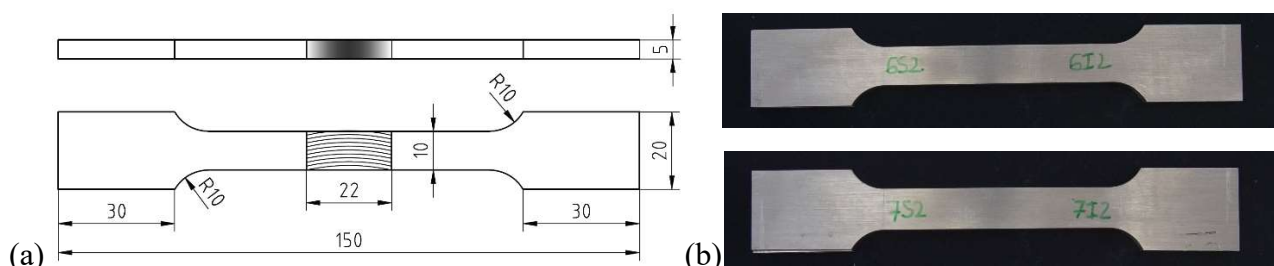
Geometry of the tensile specimen and shape of the tensile specimens
